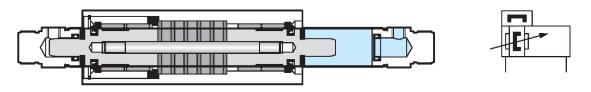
Cylinder with magnetic coupling – sectional view and symbol
